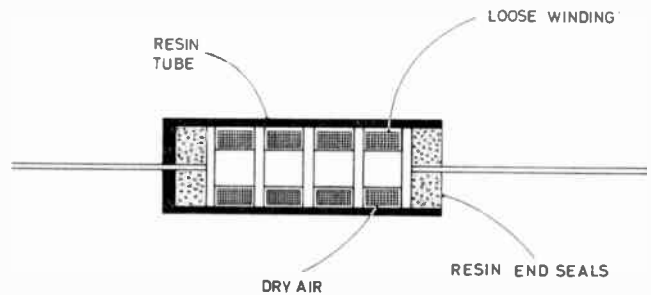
The drawing shows the cross-section of loose wound resistors, showing the end seal and the winding completely free to move
